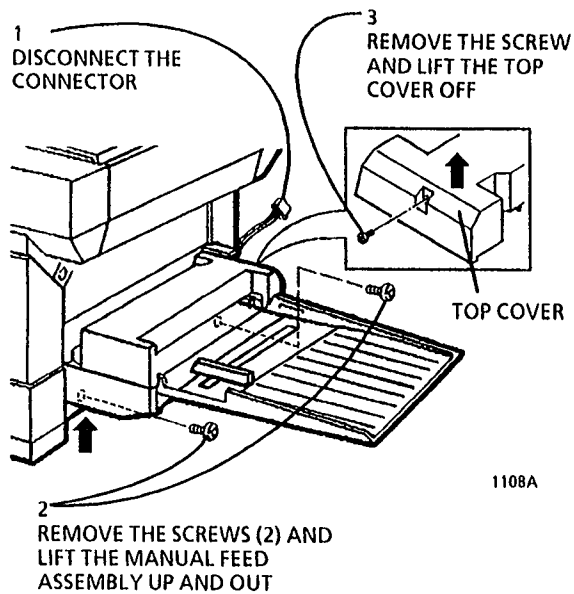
Removing the Manual Feed Assembly and the Top Cover
